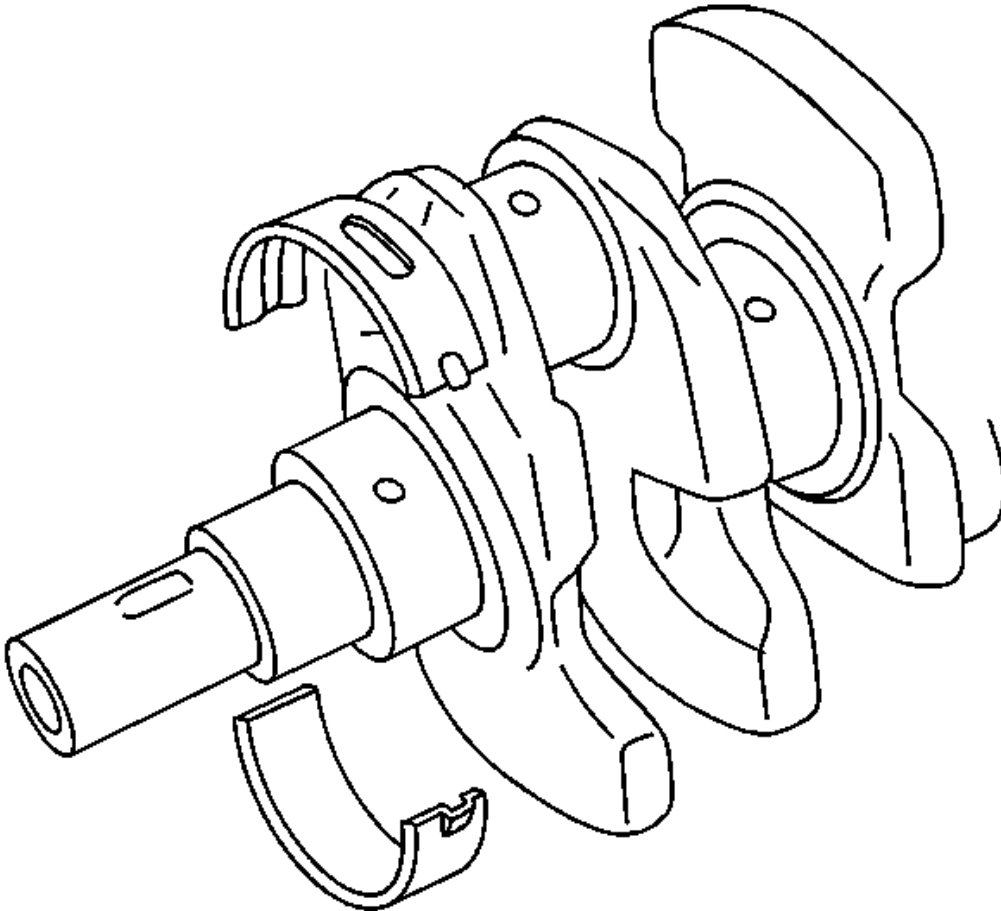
Inspecting Oil, Sludge & Carbon From Crankshaft
